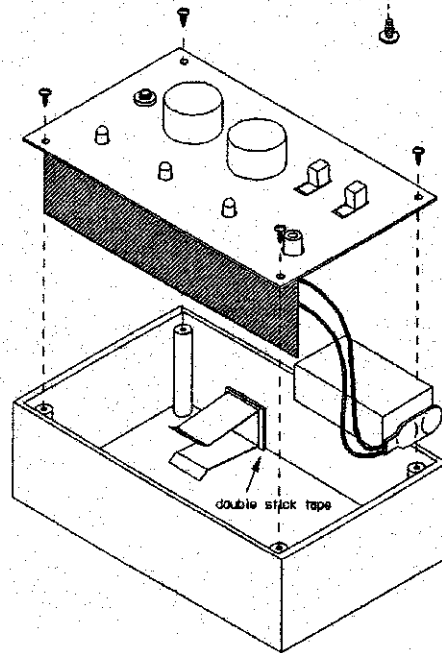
The battery holder attaches to the case with double-stick tape. The front panel is secured with (4) 4X3/8 self tap screws.
